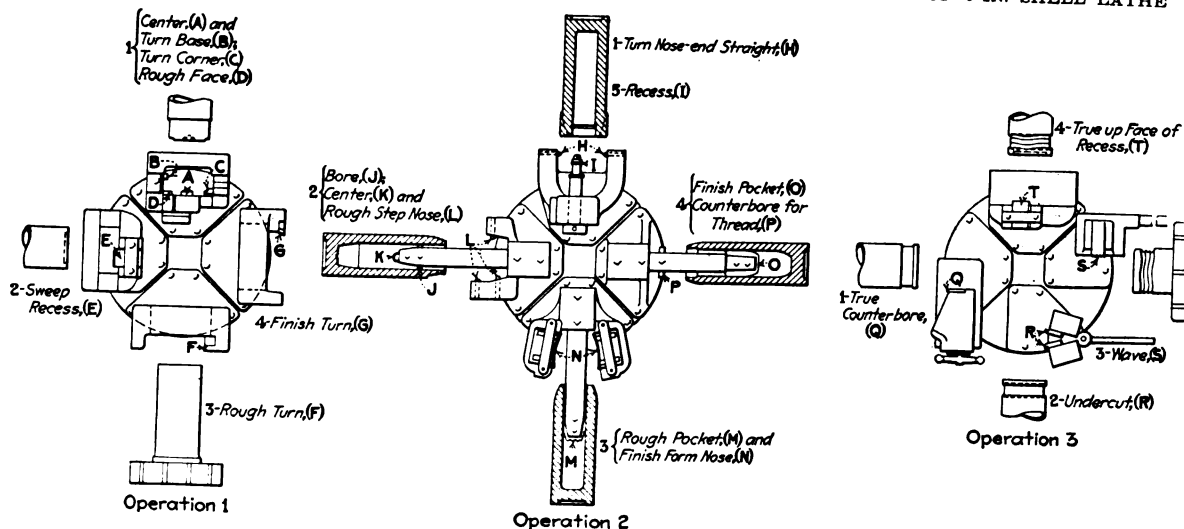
TOOLING OF DODGE LATHE FOR MACHINING 6-IN. HIGH-EXPLOSIVE SHELLS
